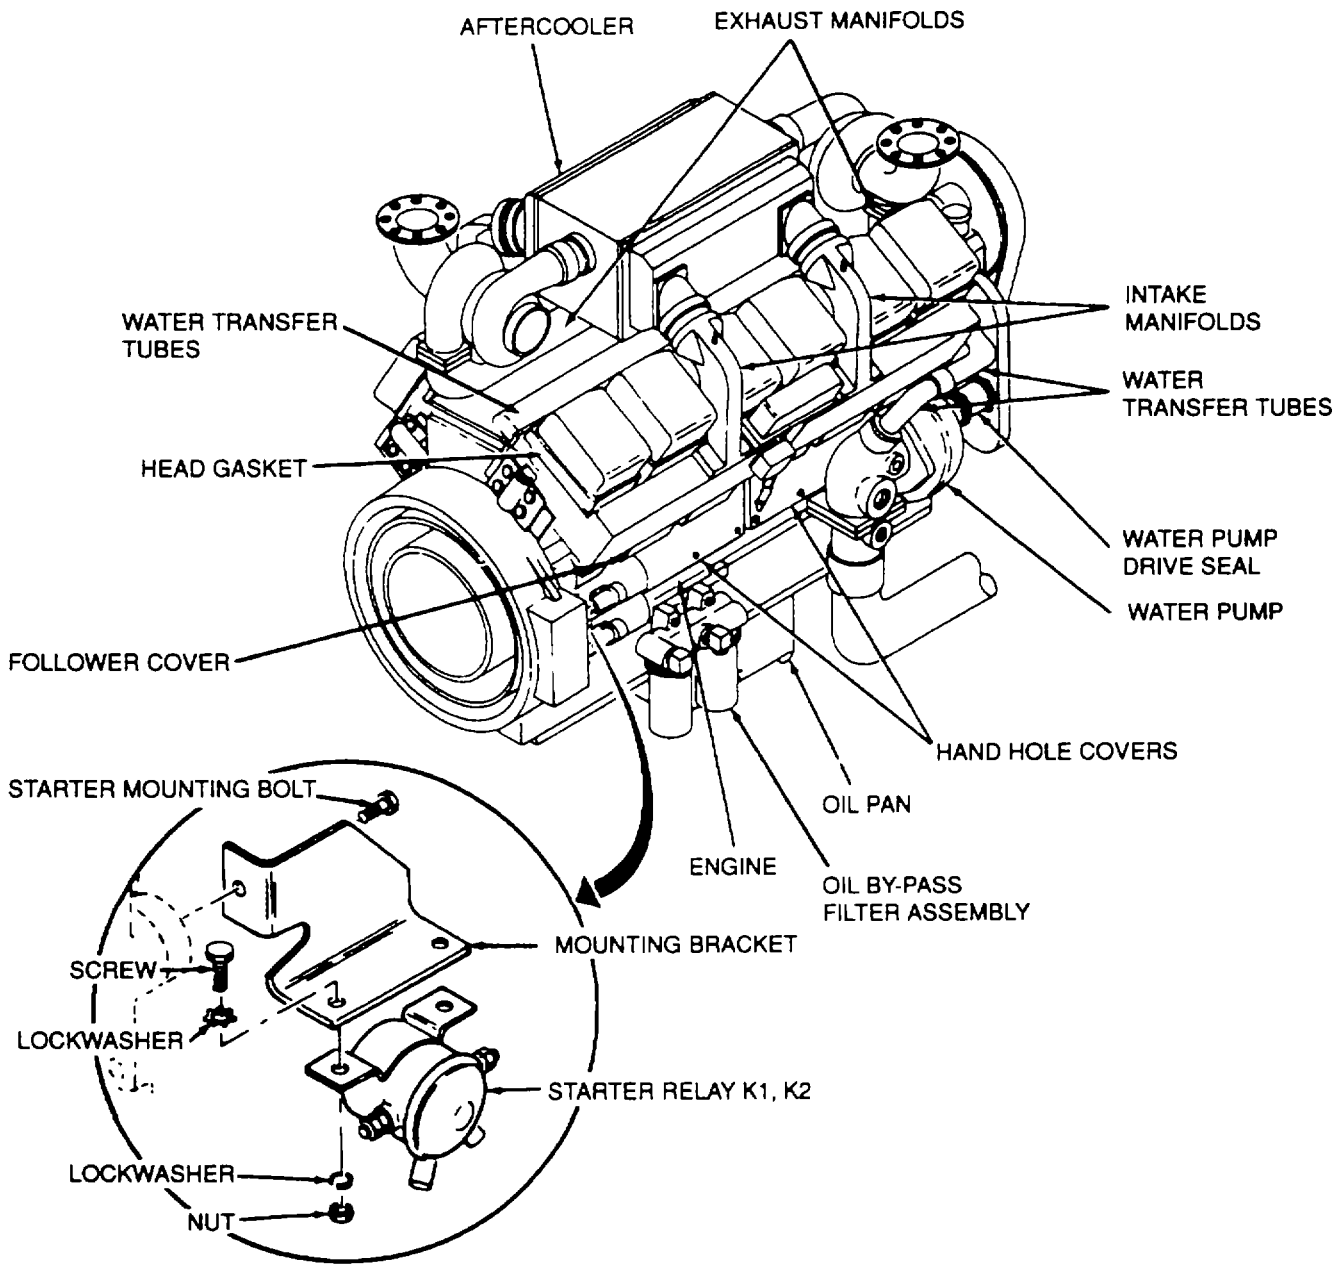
Engine and Related Parts (Sheet 5 of 5)
